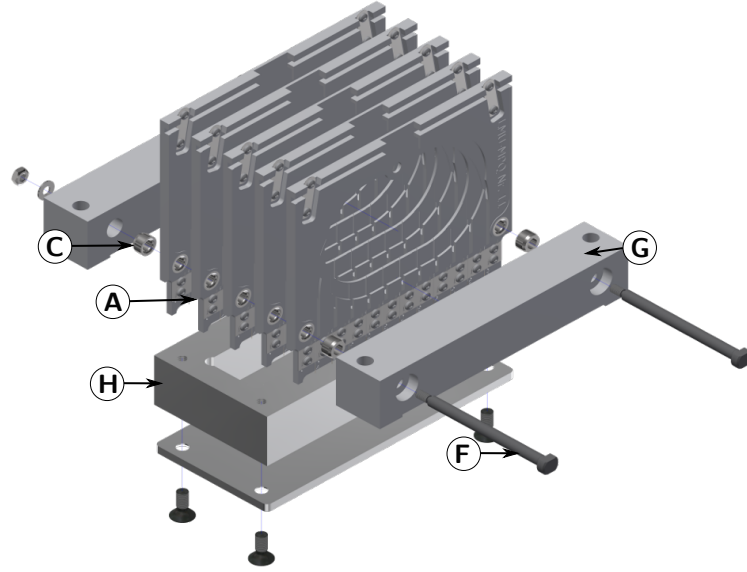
Stacked holding plates for coating and storing of micro machined fibres. (A) Holding plate, (F) Ground rod, (G) Mounting brackets, (H) Cover for fibre tips.
